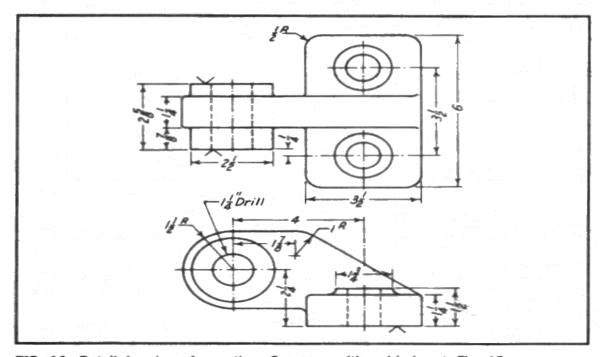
Detail drawing of a casting. Compare with welded part, Fig. 15.
